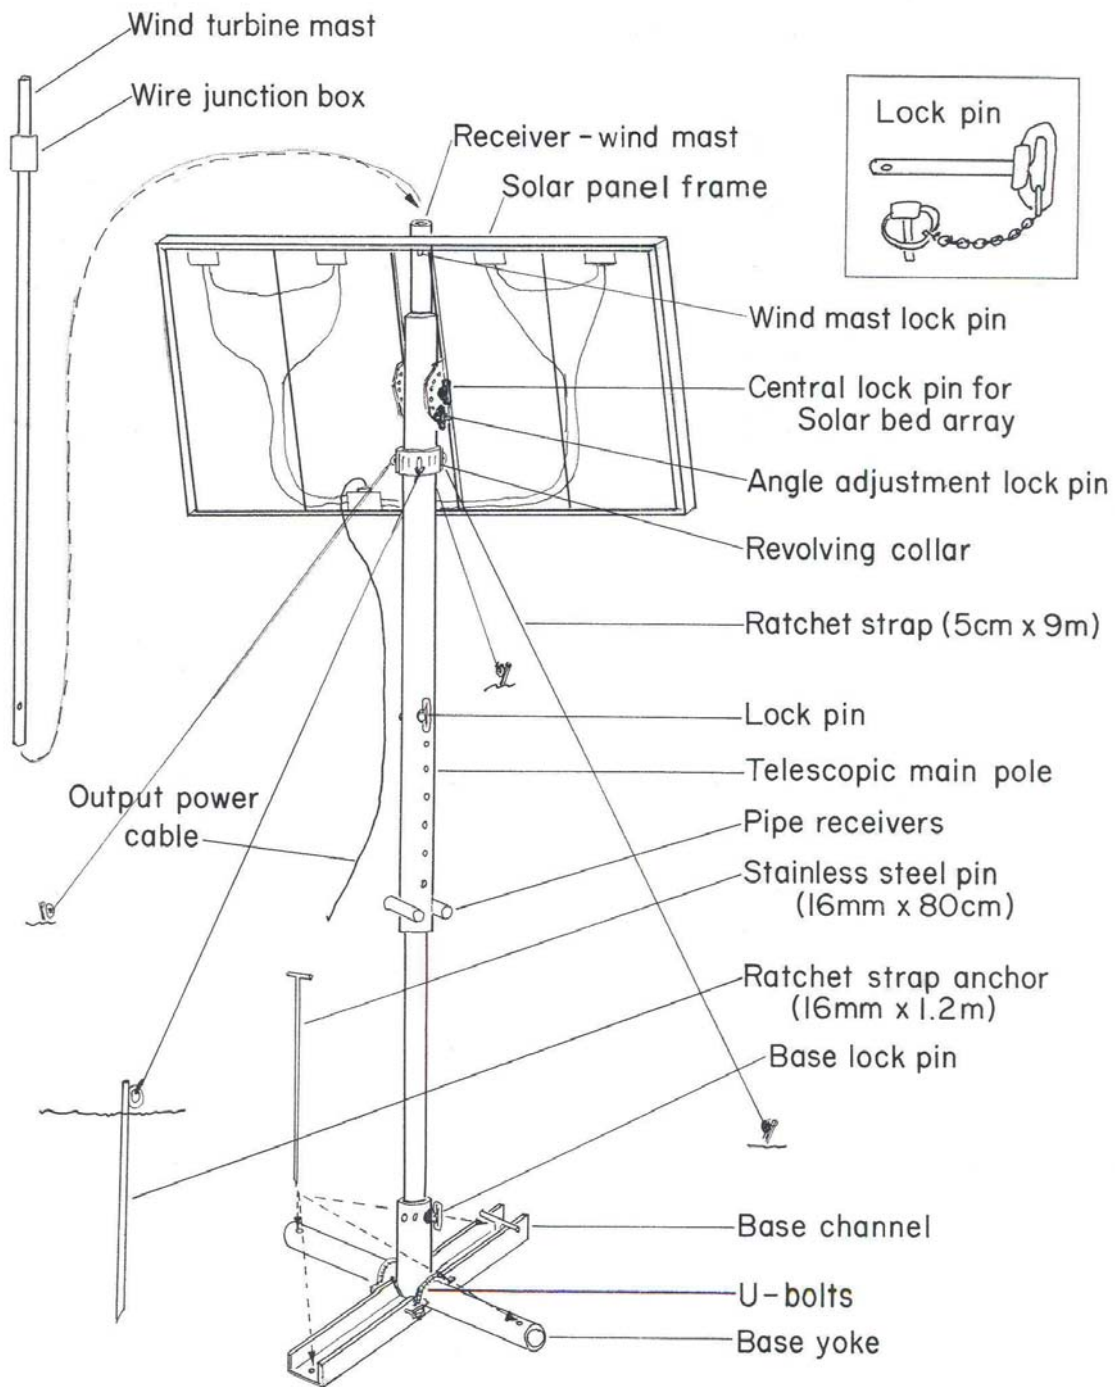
Three-dimensional view of the solar panel stand. The top right enlarged diagram shows the lock pins used throughout the assembly of the telescopic stand.
